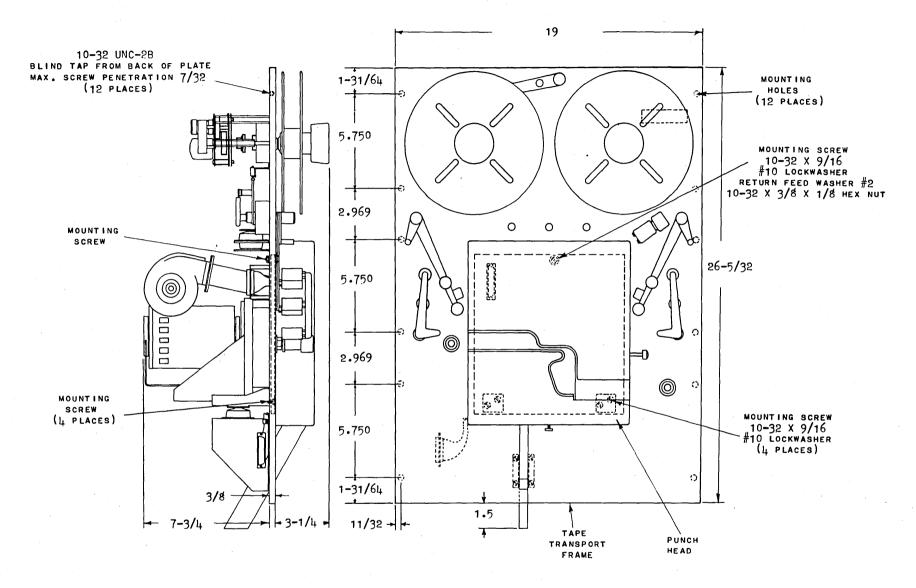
TAPE PUNCH, INSTALLATION DRAWING.
